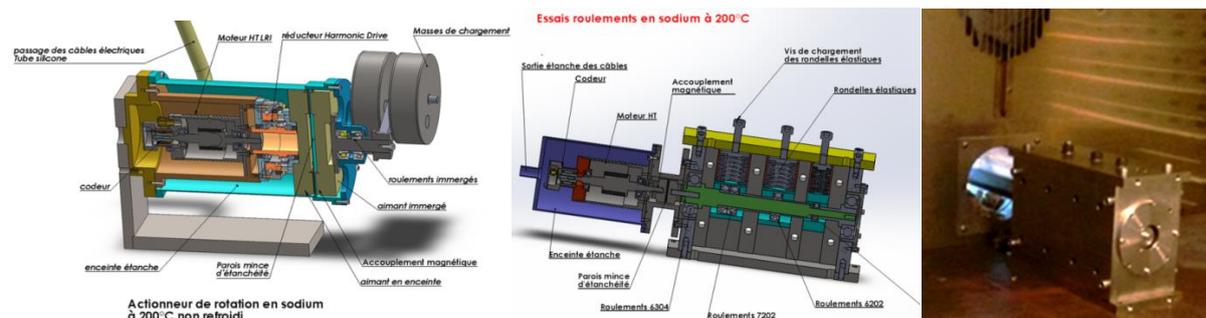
Rotating Actuator testing device (left) and in air test bench for bearings (center, right)
